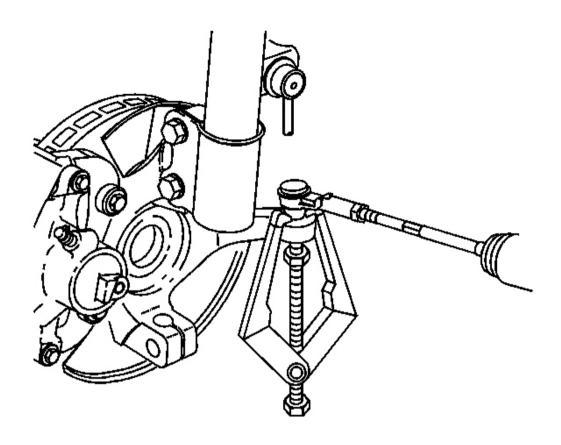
Outer Tie Rod & Steering Knuckle Courtesy of GENERAL MOTORS CORP.
